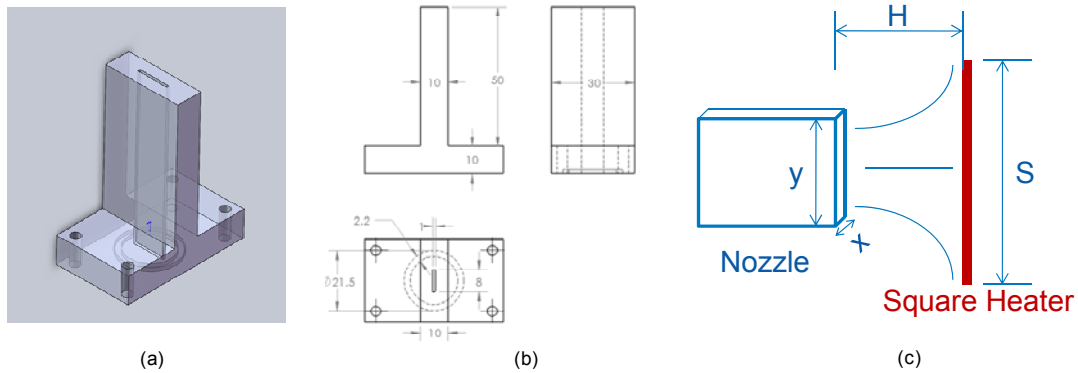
Steady jet nozzle design, 1×8 mm (a) drawing (b) dimensions (c) operational schematic
